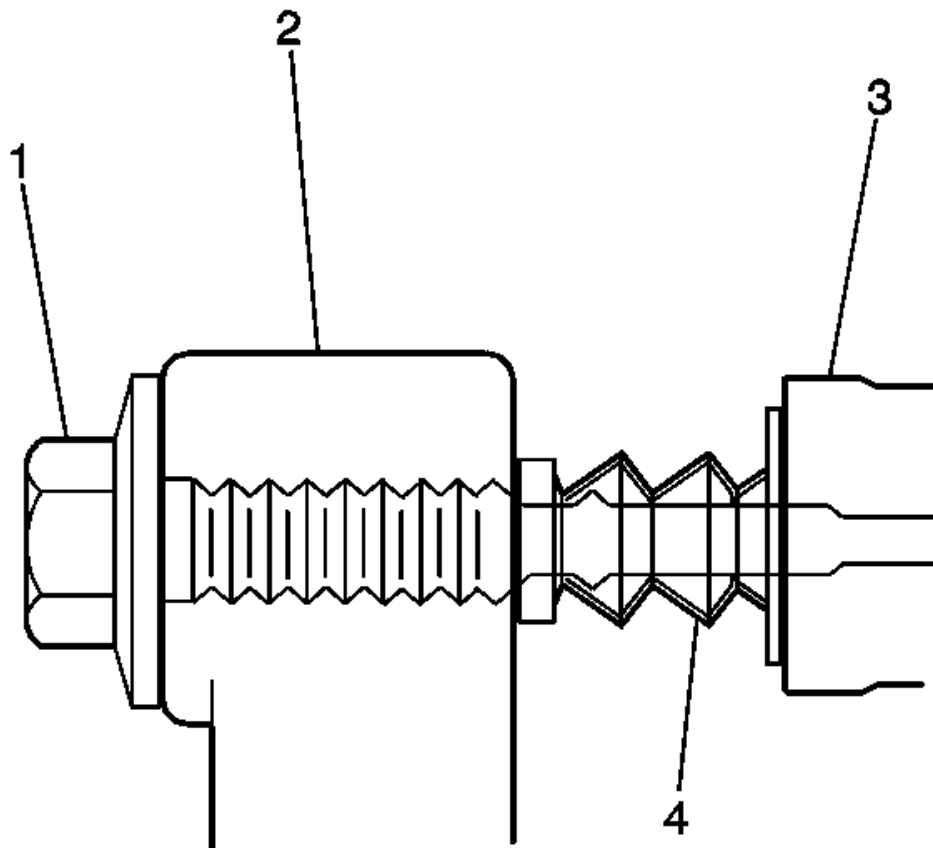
View Of Caliper, Pin, Boots & Caliper Mounting Bracket
